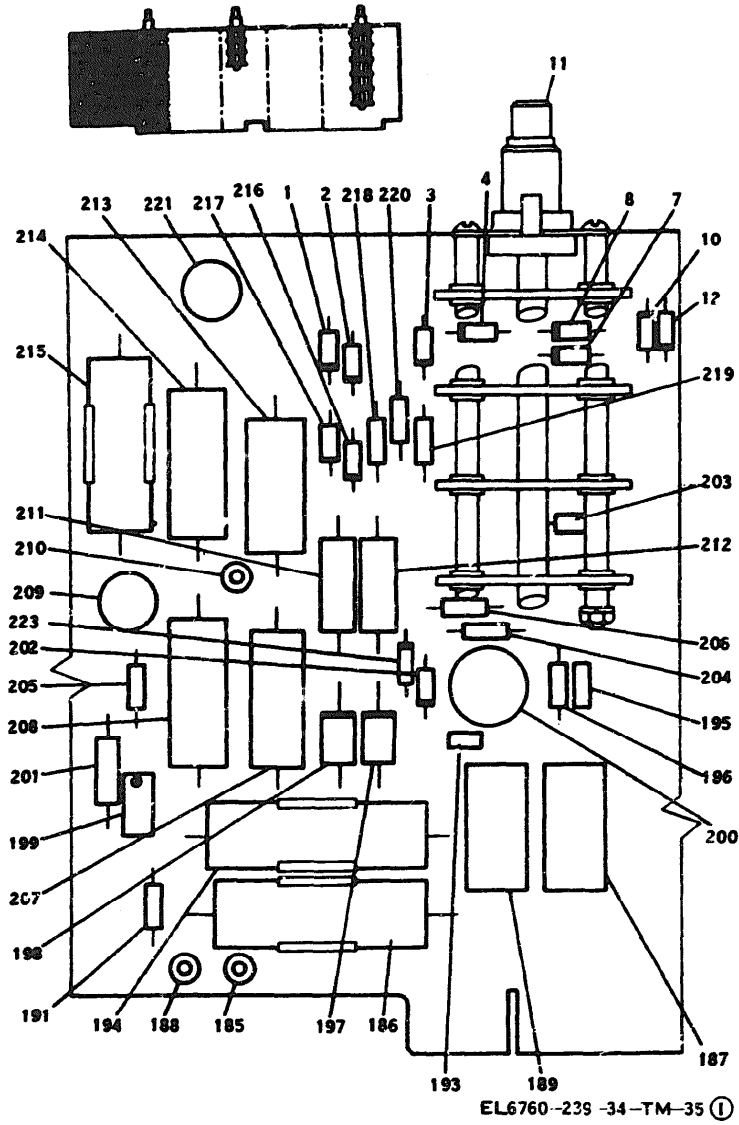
(1). Printed circuit board and component assembly A16, parts location (sheet 1 of 5).
